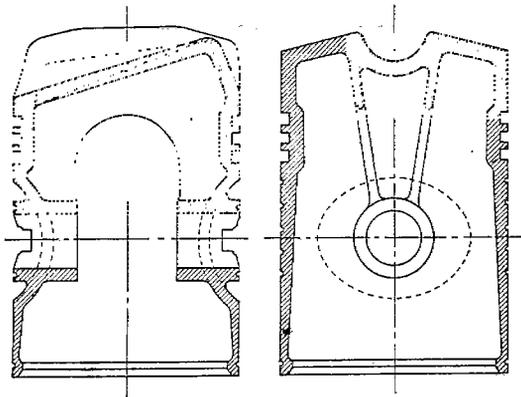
Sectional views of pistons 1 and 2 (aluminum alloy)
